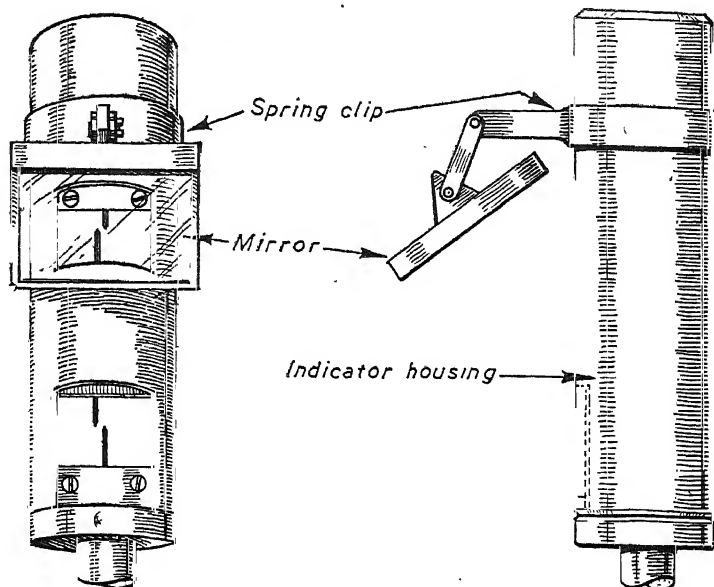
Indicator, with mirror allowing for easier sighting.
